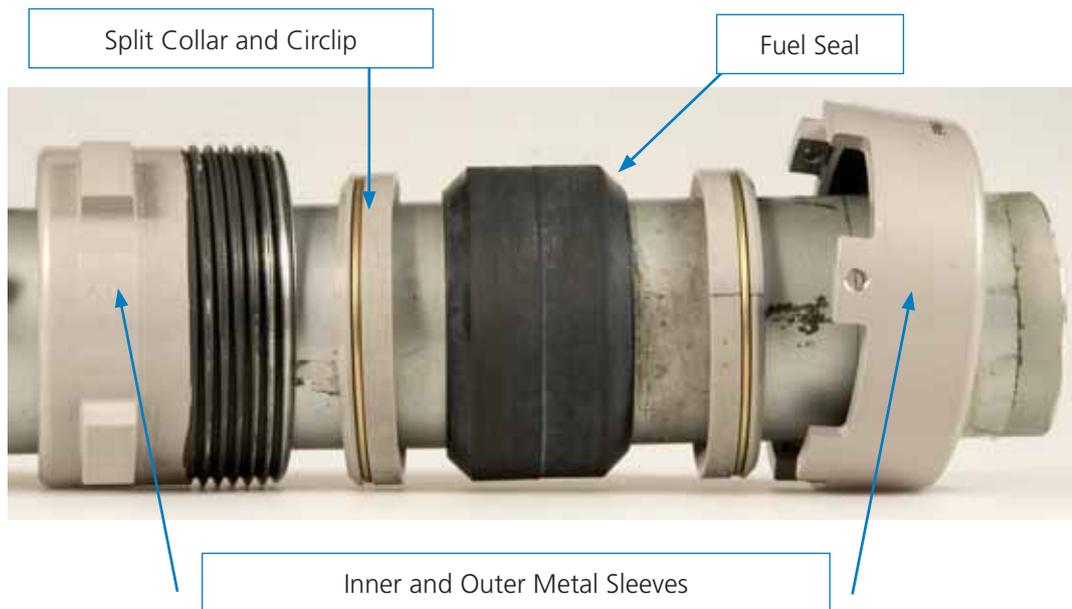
FRS Coupling Assembly (parts shown separated)
